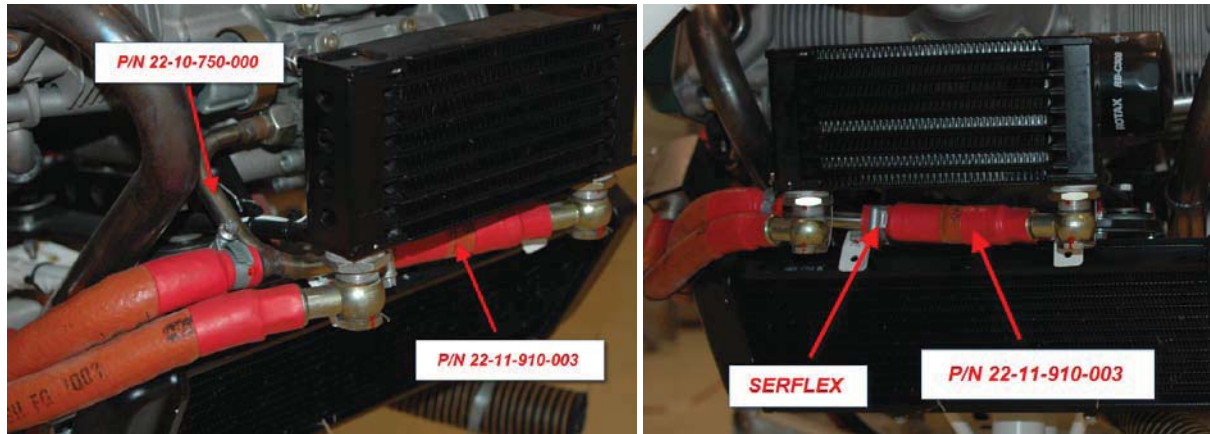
P/N 22-11-910-003 and P/N 22-10-750-000 installation
